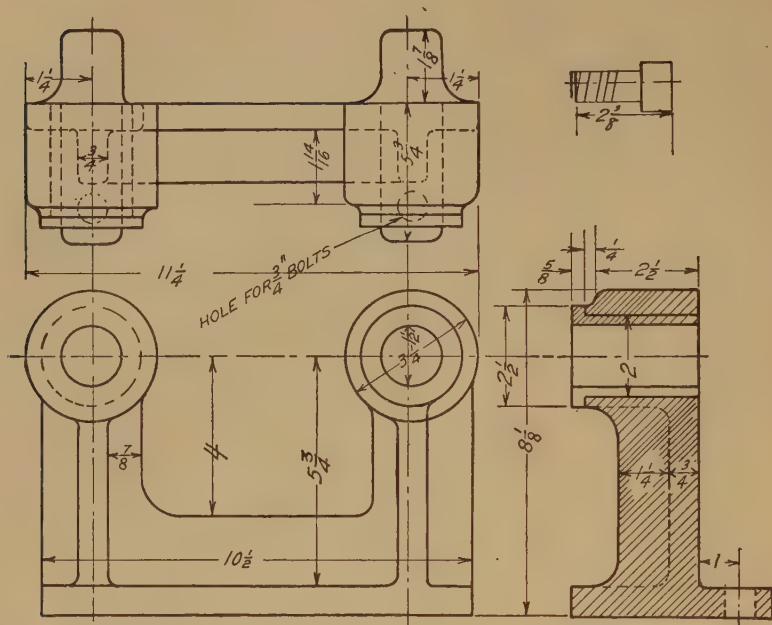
An incorrect drawing to be checked for errors (bushed bearing support).
